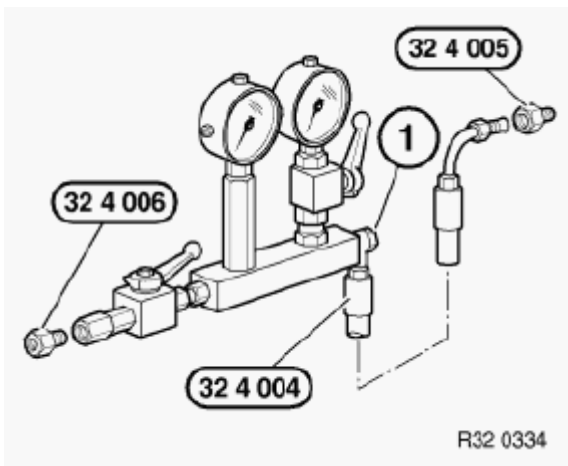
Special Tools (32 4 006), (32 4 004) And (32 4 005)
